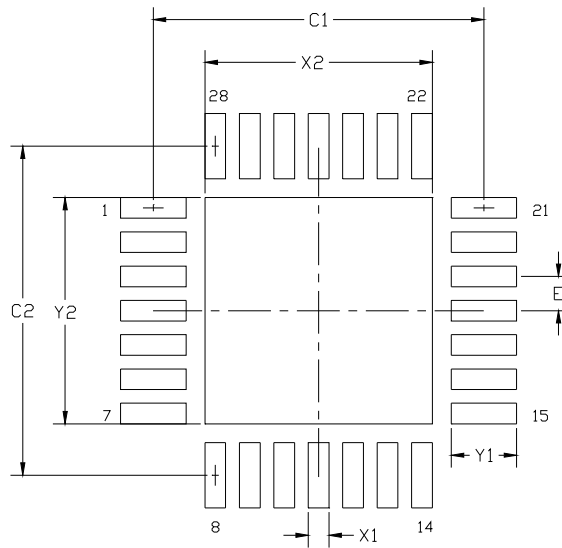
QFN-28 Recommended PCB Land Pattern
